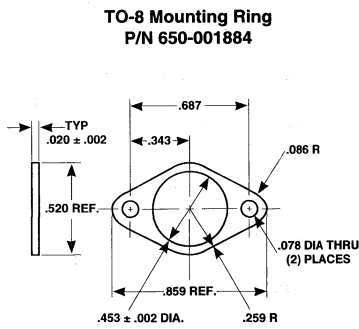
Mounting Kit for Standard TO-8 Packaged Oscillators
